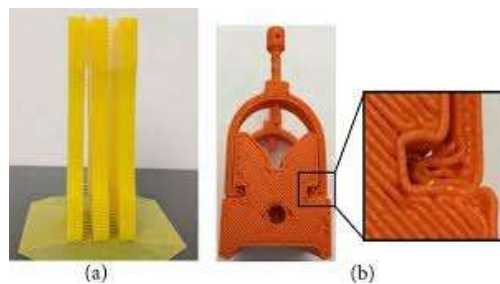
Common defects: (a) Stringing; (b) Under extrusion[9]
